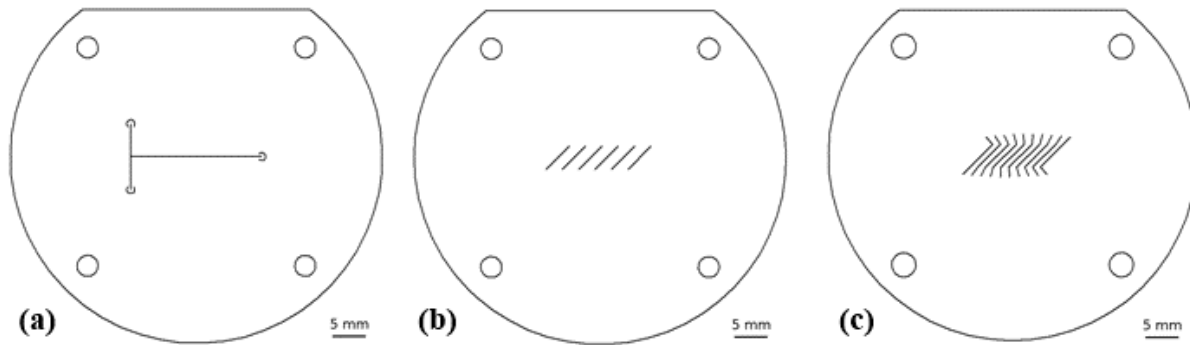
(a) toolpath for cutting electrode A, (b) toolpath for cutting electrode B, (c) toolpath for cutting optimized electrode B
